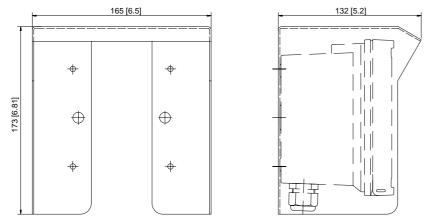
P/N 51205989-001 protective hood for wall and pipe mounting
